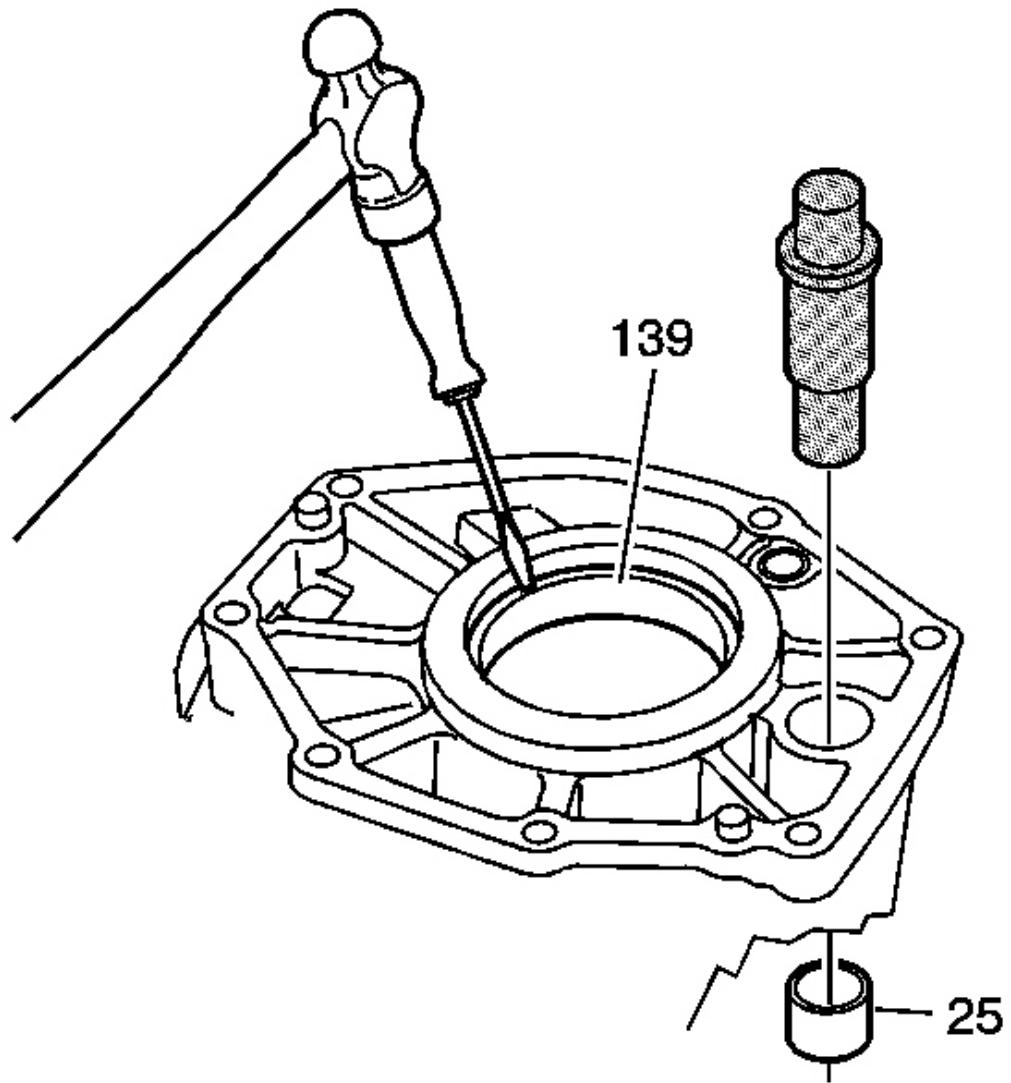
Removing Shift Shaft Bearing & Output Shaft Bearing Race From Rear Case
